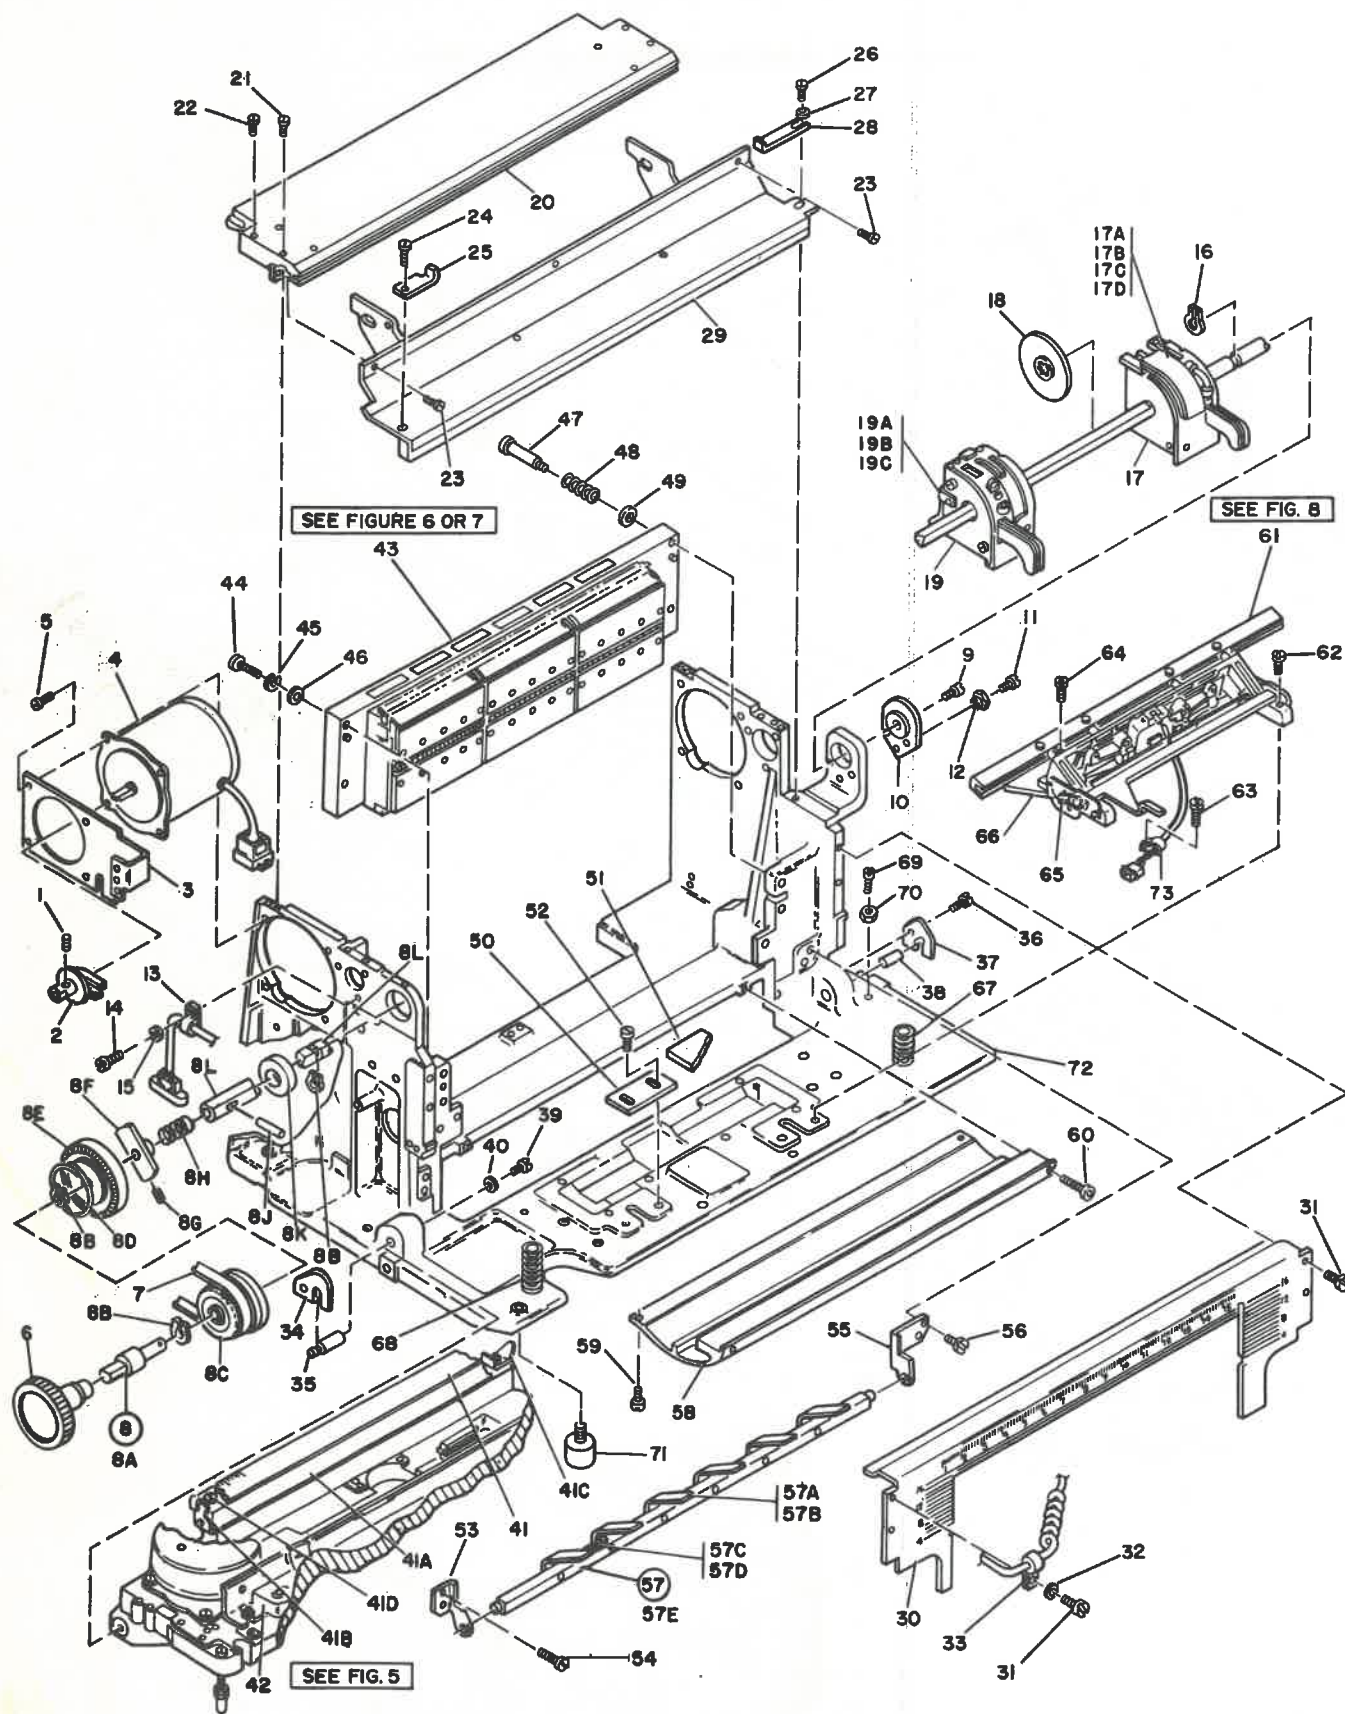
BASIC MECHANISM ASSEMBLY. SEE LIST 4.
